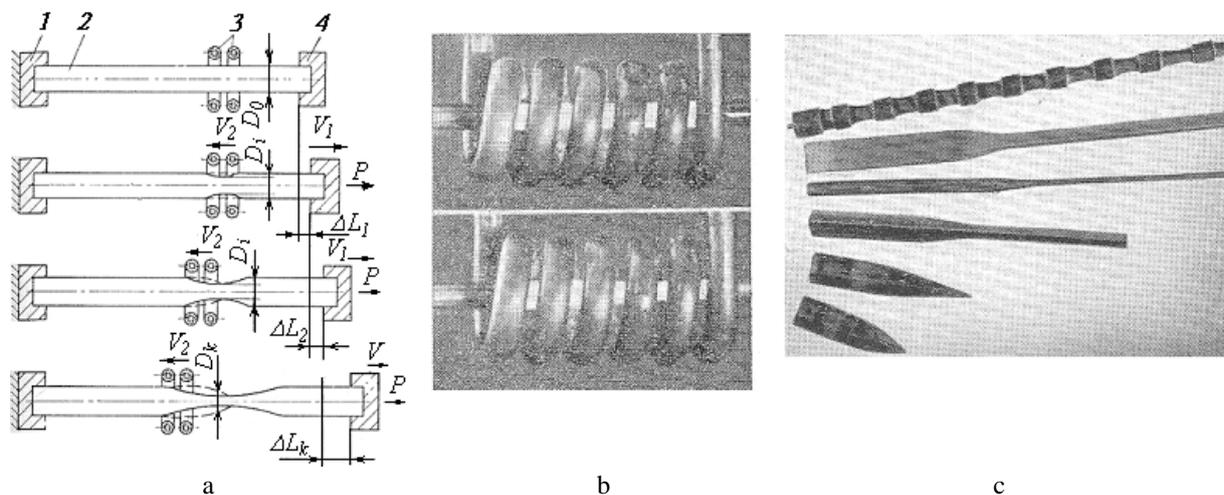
Shape forming in superplasticity mode [11]: a – scheme of process; b – workpiece in the inductor; c – typical parts; 1 and 4 – fixed and movable clamp of straining press; 2 – workpiece; 3 – inductor
